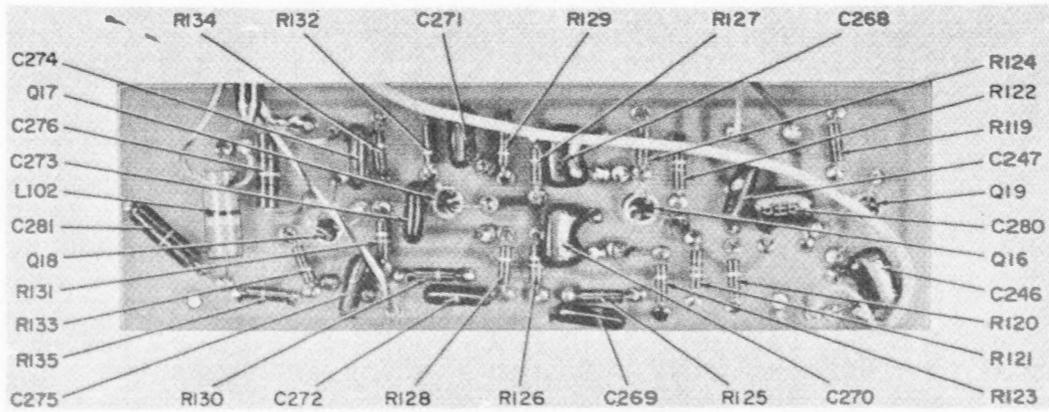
Signal Data Translator CV-1377()/PRC-47 (A3), Card Assembly E46, Parts Location
